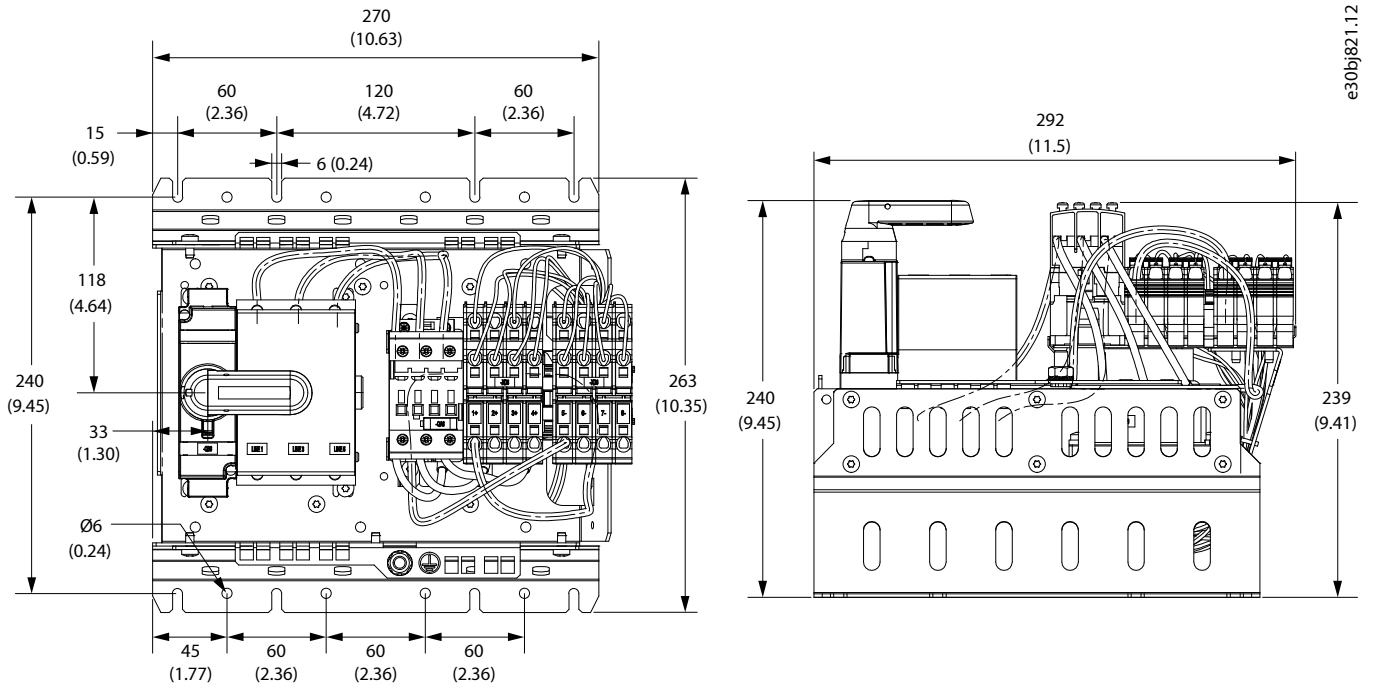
Dimensions of the Pre-charging Unit in mm (in), IEC
